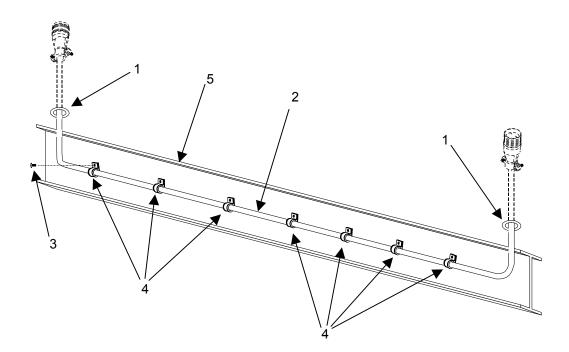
Replace a Damaged 12-ft MKT Crossway Cable
